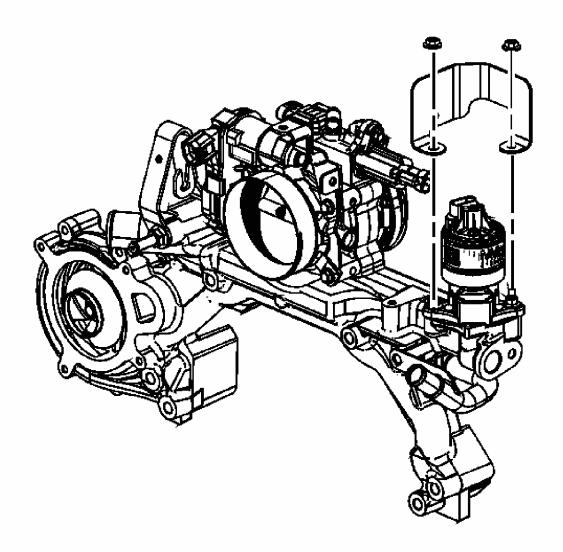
Identifying EGR Bracket Shield Nuts Courtesy of GENERAL MOTORS CORP.
